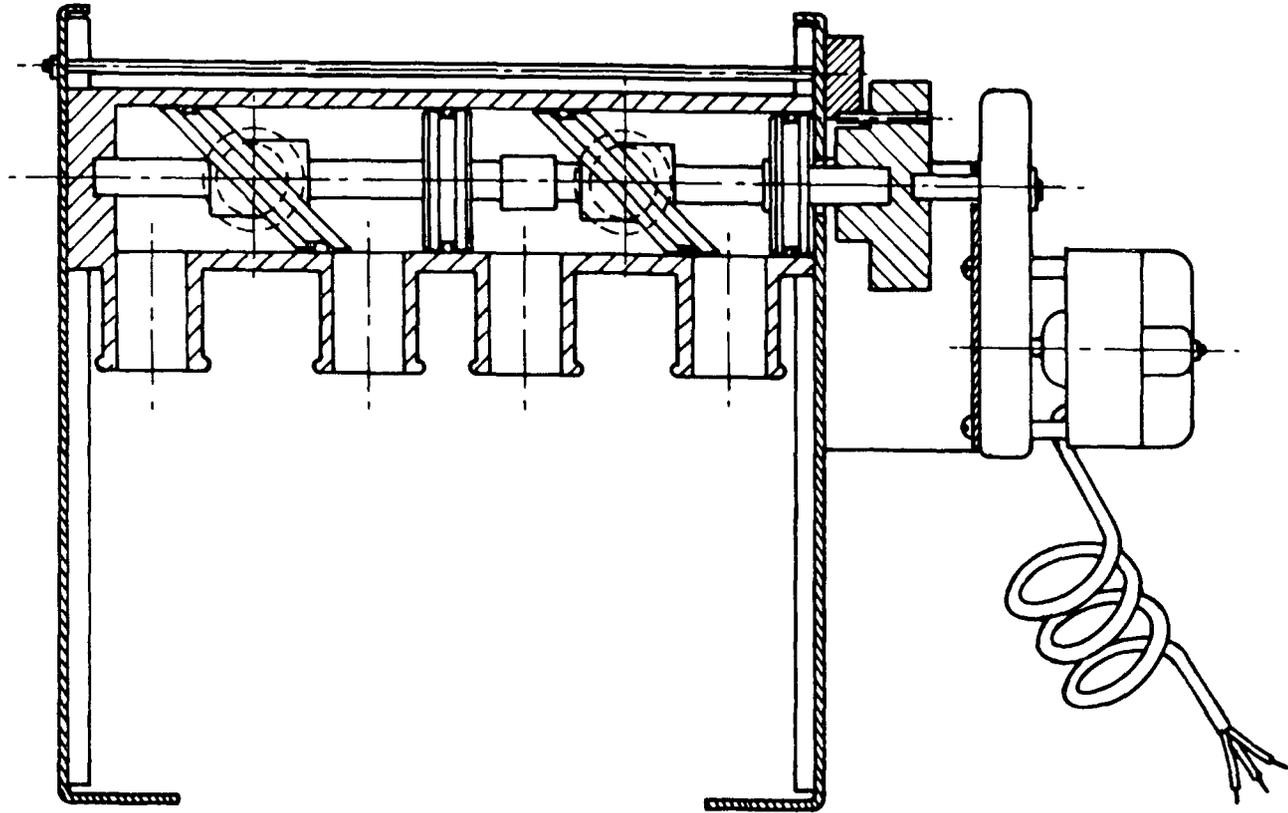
3 Eight-Way Valve and Motor Assembly
